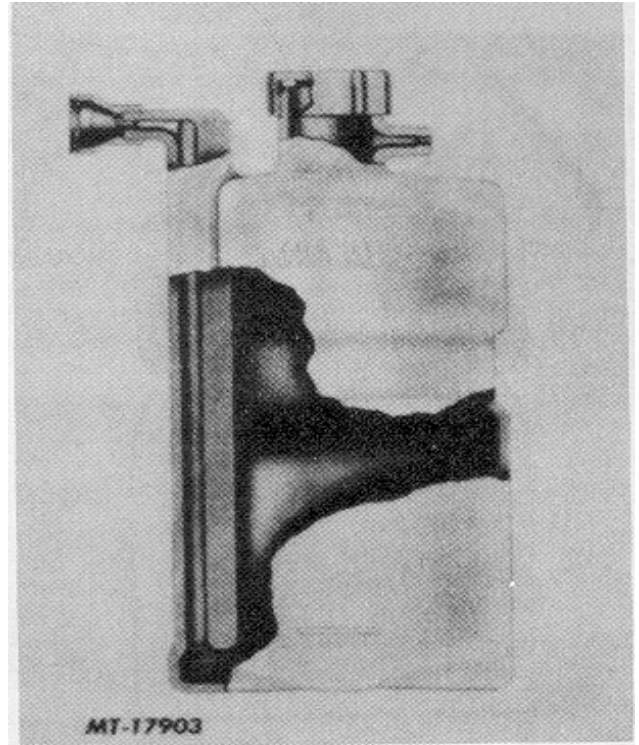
Cutaway View of AE-2 Alcohol Evaporator
